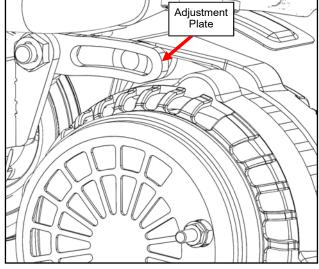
(Install Alternator, Upper Mount/Adj. Plate)
